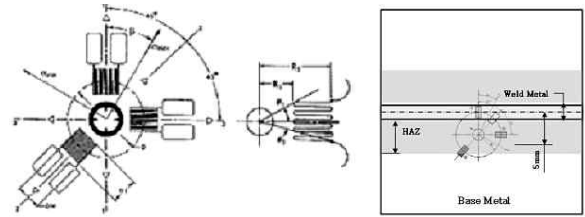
Strain gauge location for the welding residual stress measurement
